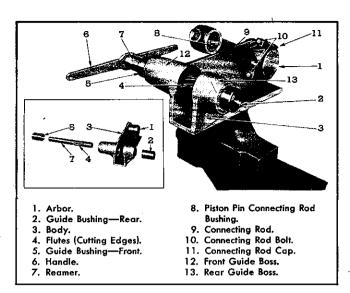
Preparation for Reaming Piston Pin Bushings in Connecting Roll with Tool J-1686.
